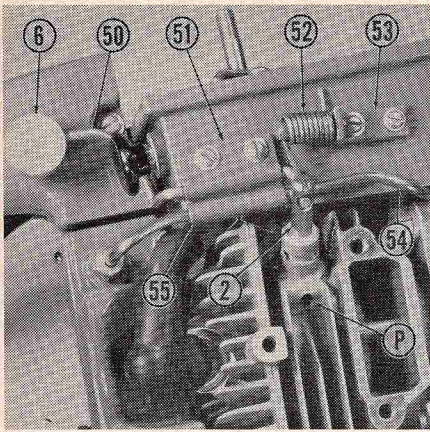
View showing compression relief mechanism; all models except XL-101 are so equipped.
